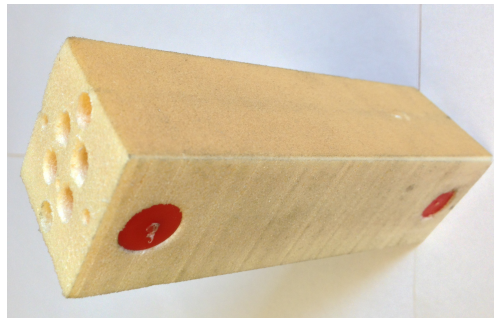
Divinycell support structure with 2 M3 holes for PCB mounting and holes for the coaxial feed lines.
